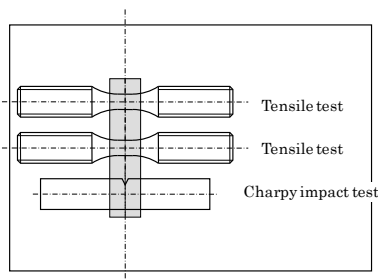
Position of tensile test specimen and Charpy impact test specimen in thermal cycle material
